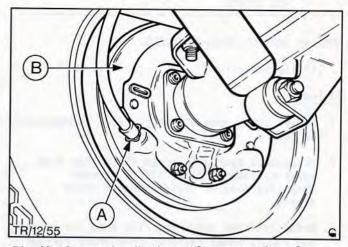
Remove handbrake cable to carrier plate retaining clip.
